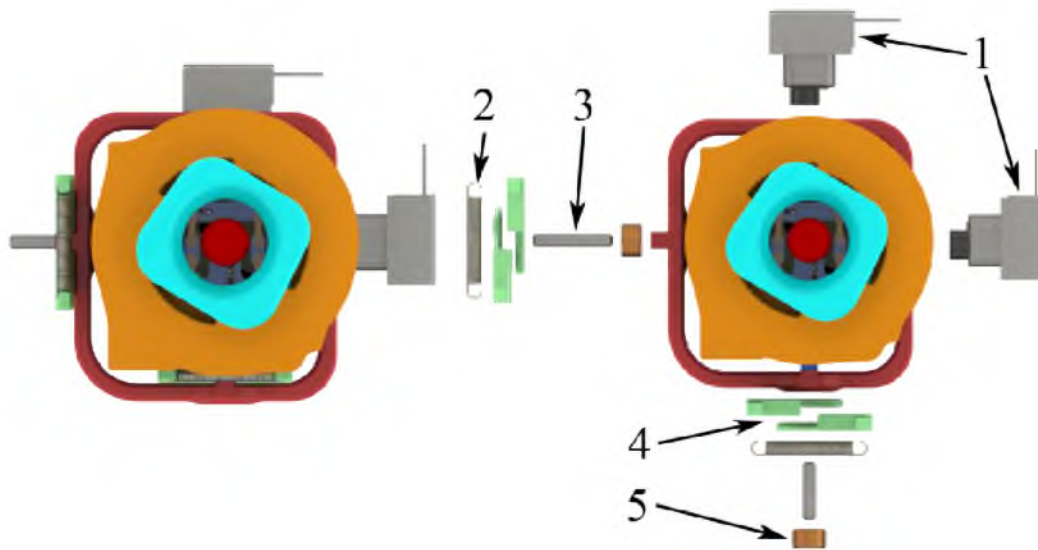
Front view of gimbal assembled and exploded. (1) Potentiometers (2) Tensile spring (3) 2 mm steel shaft (4) Spring return arms
